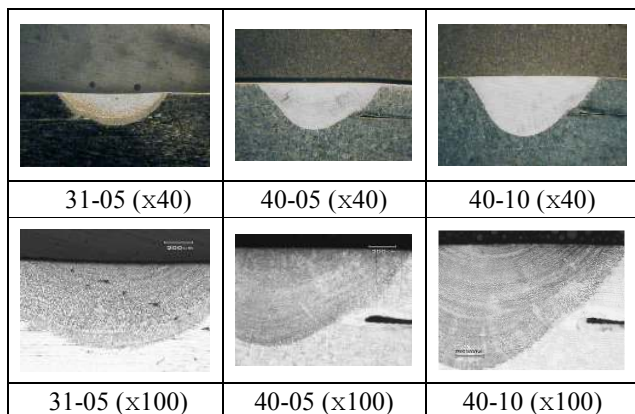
Macro-sections and microstructures of SUS 316 weld metals with dual rod specimens.
